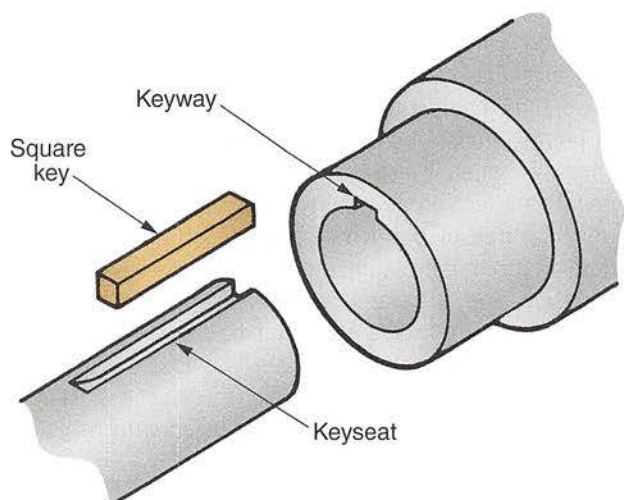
A square key is used to prevent a pulley or gear from rotating on its shaft.
